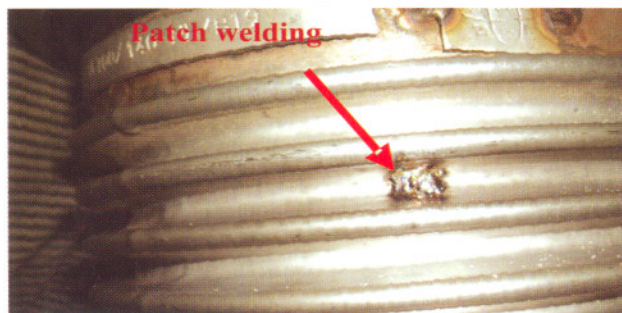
A view of punctured bellow ply at inner convolution after repair by patch welding.
